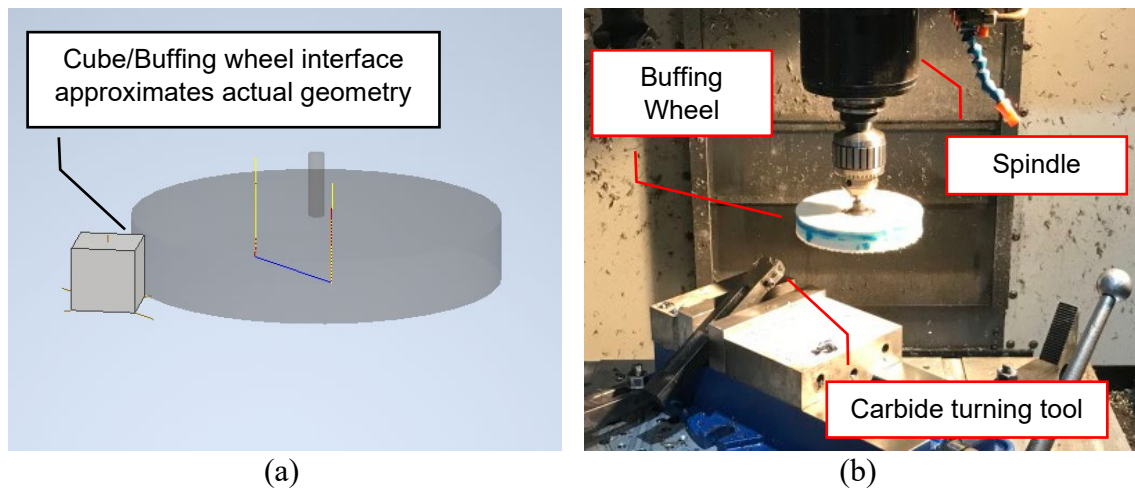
(a) Image of the tooling and workpiece geometry created for the tool honing program; (b) CNC milling machine interior, equipped with buffing wheel impregnated with $1\ \mu\text{m}$ diamond paste, carbide turning tool is held in place by a tool and vise.
